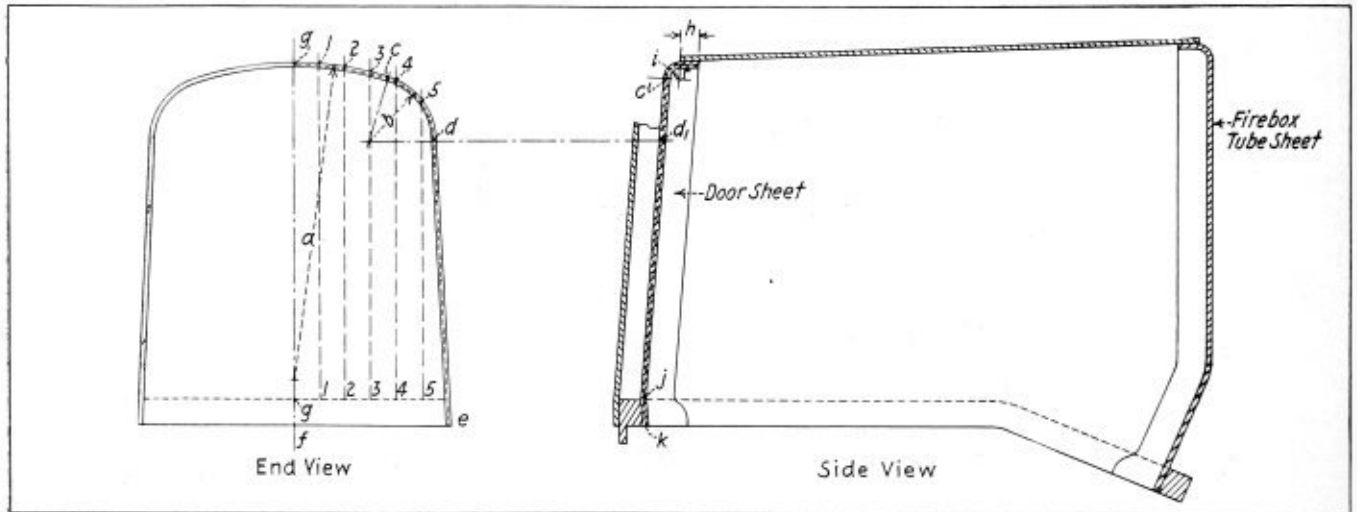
Method of Laying Out Door and Side Sheets on One Form of Firebox
